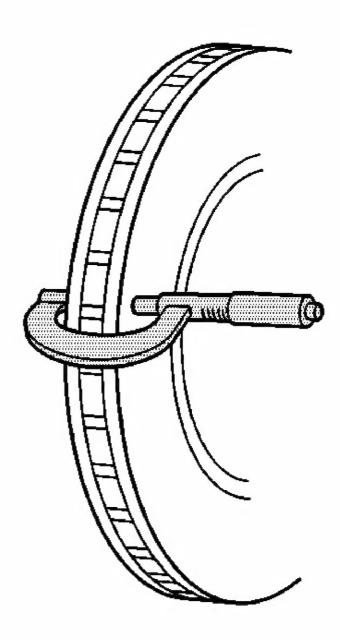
Measuring Brake Rotor Thickness Courtesy of GENERAL MOTORS CORP.
